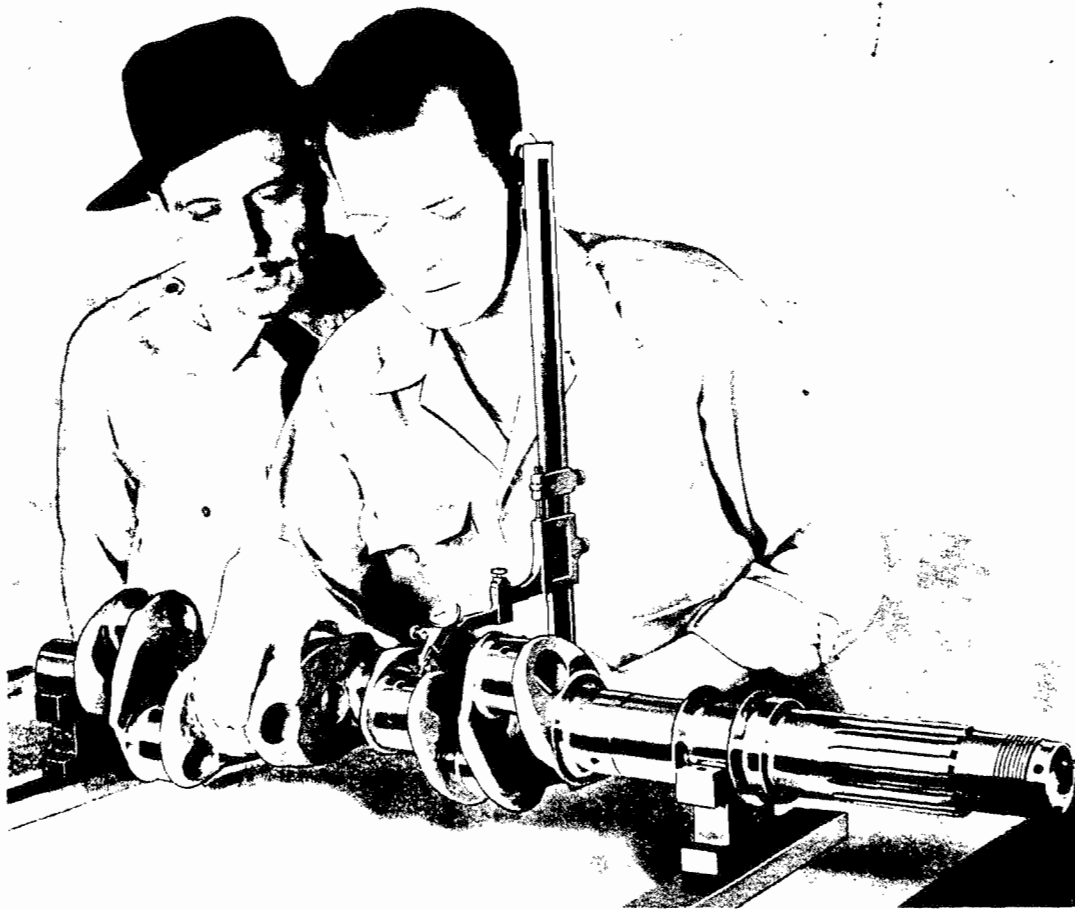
INSPECTING CRANKSHAFT ALIGNMENT.
